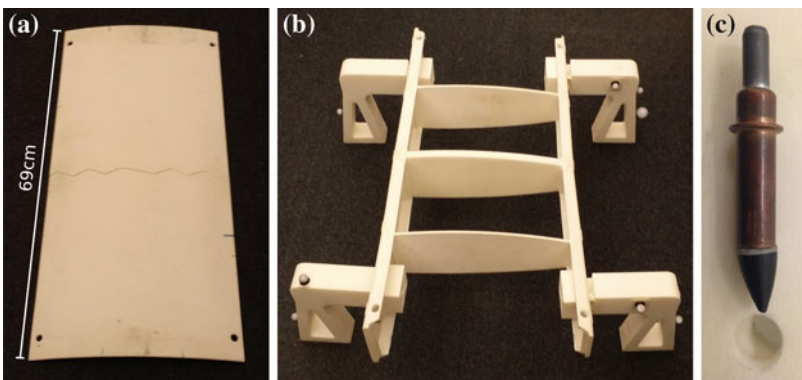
Assembly parts used in our experiments. a Panel. b Box. c A fastener and hole (misaligned) as used in this task. The fastener is an adapted cleco. The holes were drilled to permit a cleco to fit up to the flange with a tolerance of 1.5 mm
